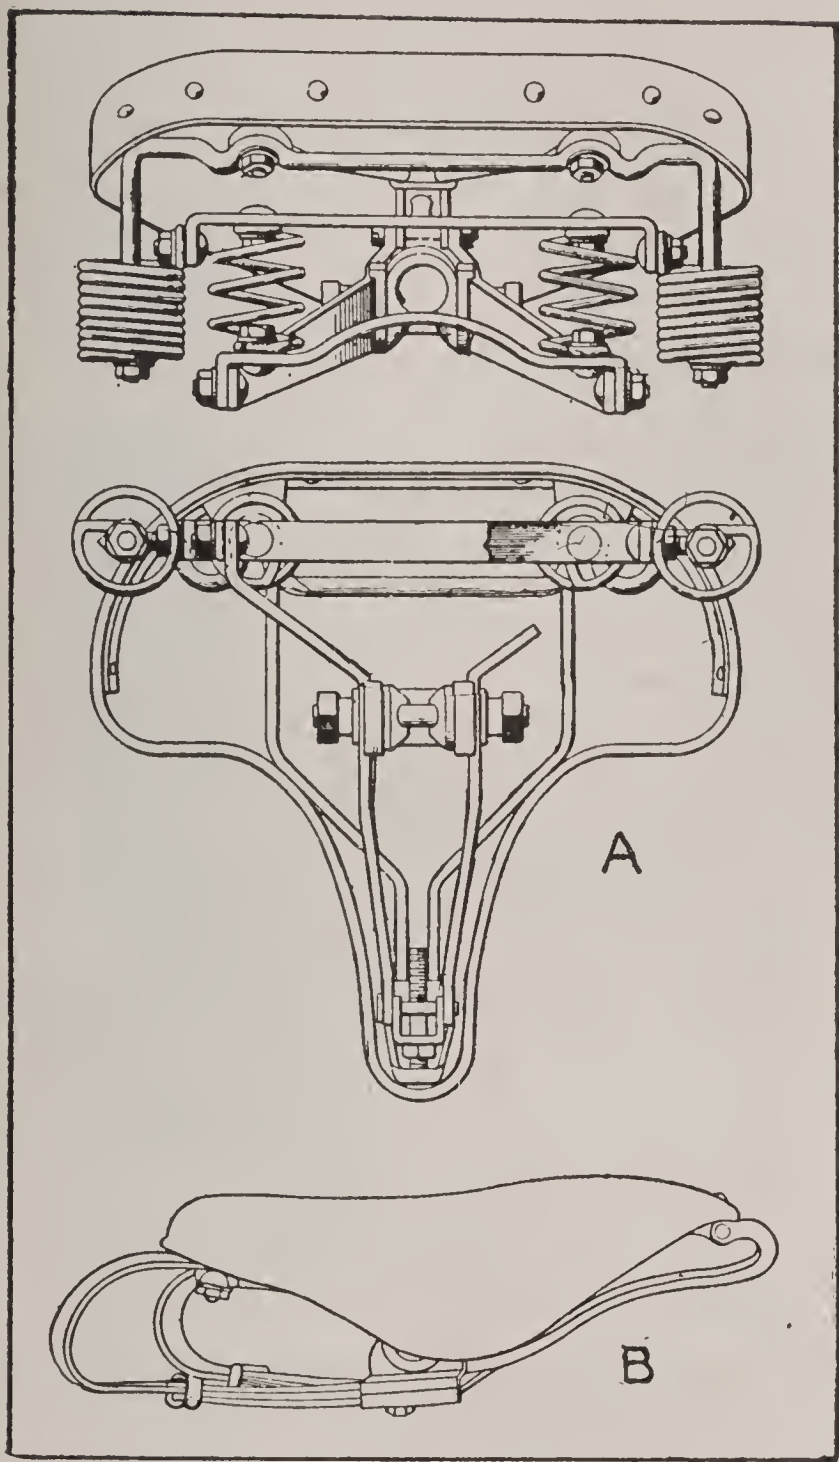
Showing the Two Forms of Springs Used in Supporting Motorcycle Saddles.
